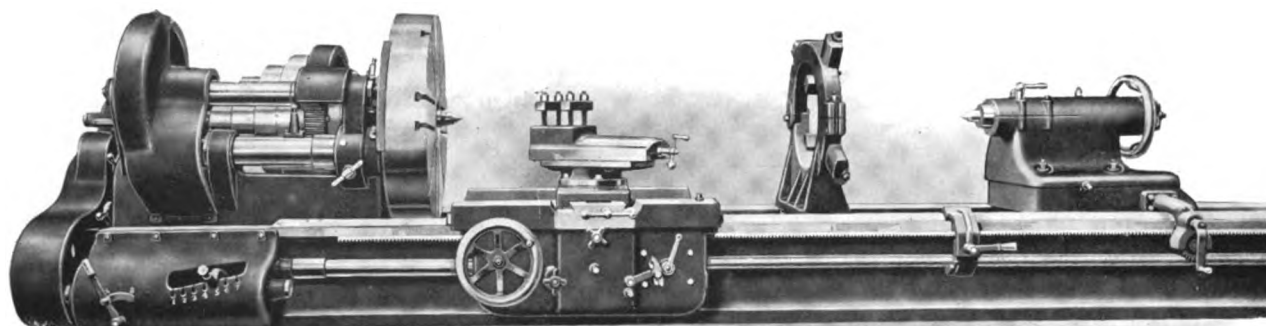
Pittsburgh Fifty-Inch Triple Geared Lathe, Belt Drive
